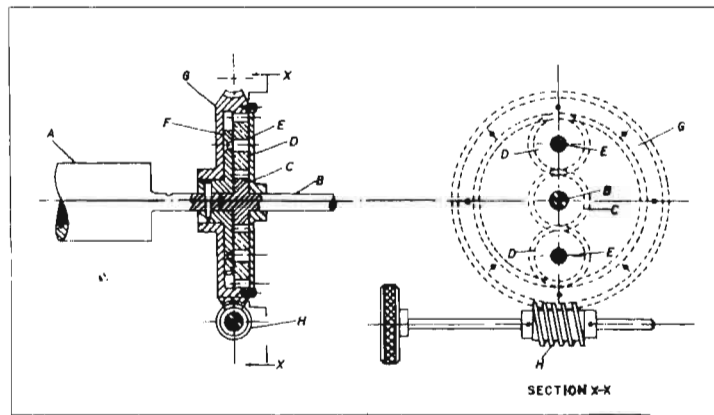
When the ring gear *G* is rotated by worm *H*, the timing of driven shaft *A* changes with respect to the driving shaft *B*.
